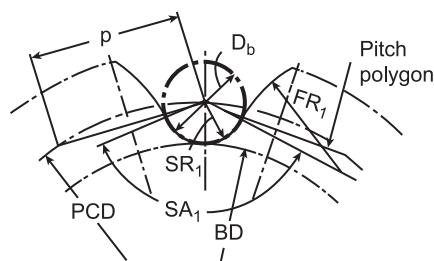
Notation for minimum tooth gap form for bush chain.
